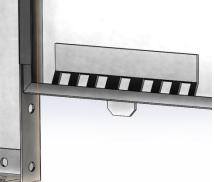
Side panel fixing Figure [53] Side panel guiding flange
